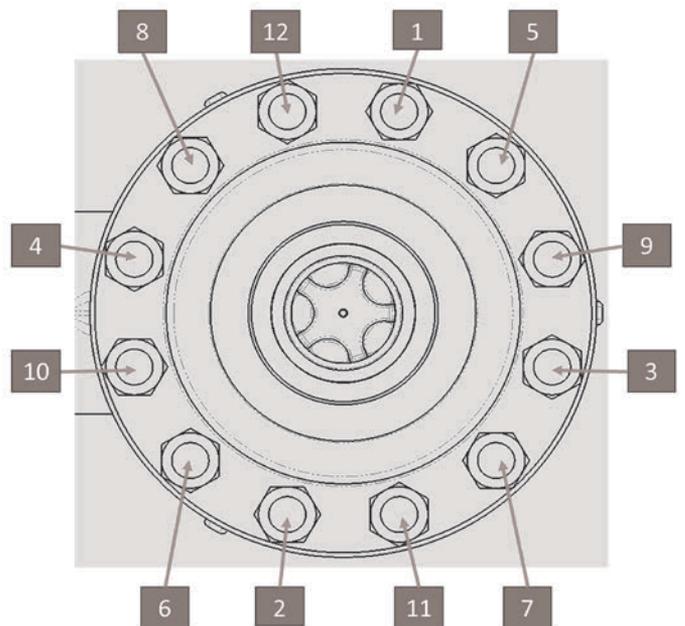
Torque Sequence Single Bolting Circle 12 Bolts
